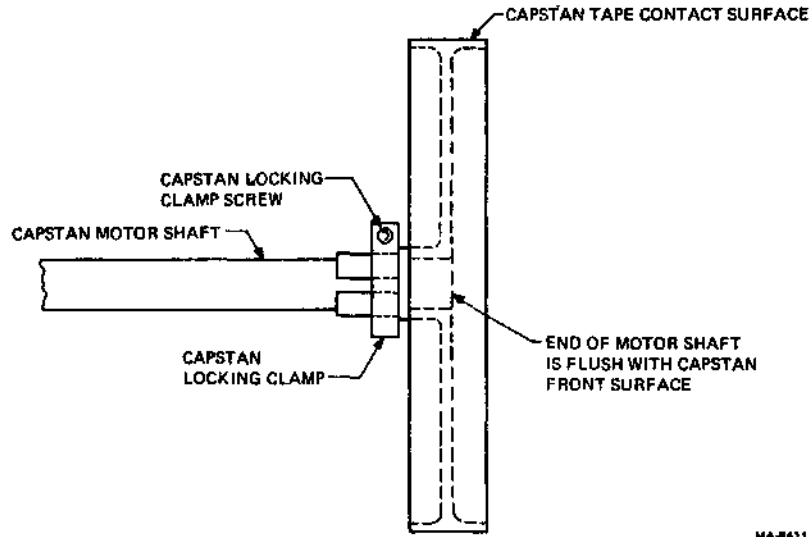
Capstan Positioning on Capstan Motor Shaft
